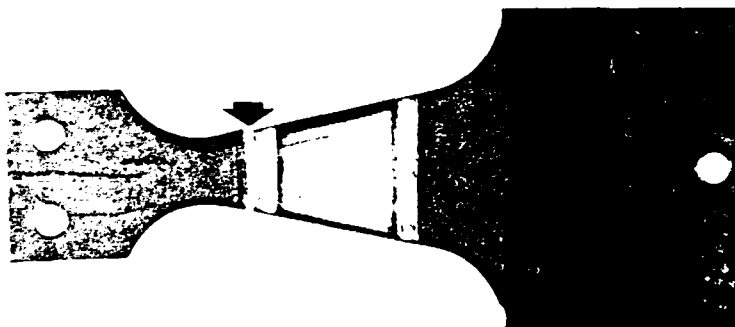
Typical brazed cantilever bending HCF specimen. Failures occurred just outside the braze fillet (arrow).
